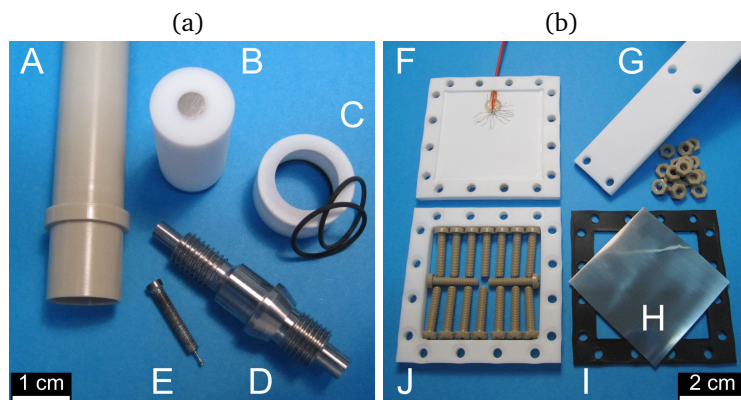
Sample holder for the (a) RDE and (b) plate-electrode setup: (A) RDE shaft, (B) PTFE sample holder, (C) PTFE cap with o-rings, (D) stainless-steel adapter, (E) set screw with contact pin, (F) PTFE sample holder, (G) PTFE fixture, (H) stainless-steel shim, (I) Viton gasket, (J) PTFE frame.
